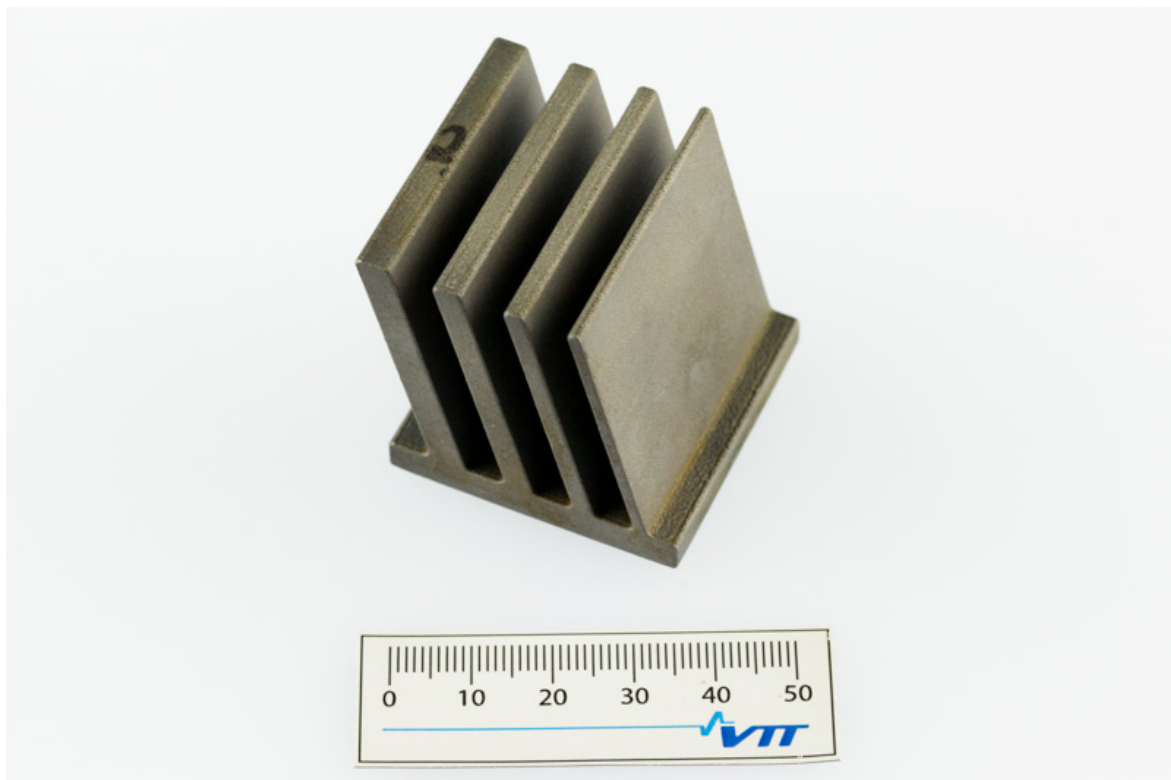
The inclined plates printed in H13 tool steel at 30 μm layer thickness. No defects were detected.
